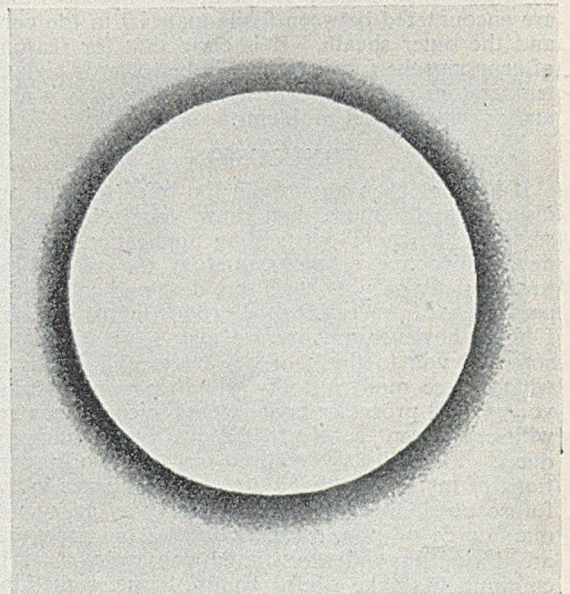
Auto-radiograph of Section through Carburized Steel Container.
